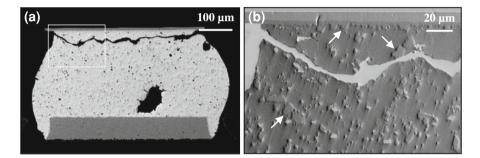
BSE images of a cross-section through a Sn-0.7%Cu-0.1%Ni solder joint that failed after 434 cycles of thermal cycling between -40° C and 125°C. a Overview of the solder joint, which has failed due to the propagation of a fatigue type of crack. b Detail of the area inside the white *frame* in Fig. 2.38a. The *arrows* indicate IMC particles, which have mainly the (Ni, Cu)₃Sn₄ composition. Data from imec
